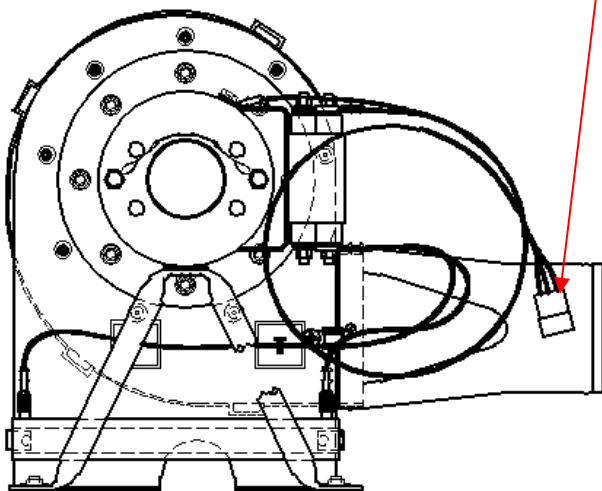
Aft Evaporator Blower Assembly S-6102EC-3 used in 206EC-200-9,-10,-11 AC kits
